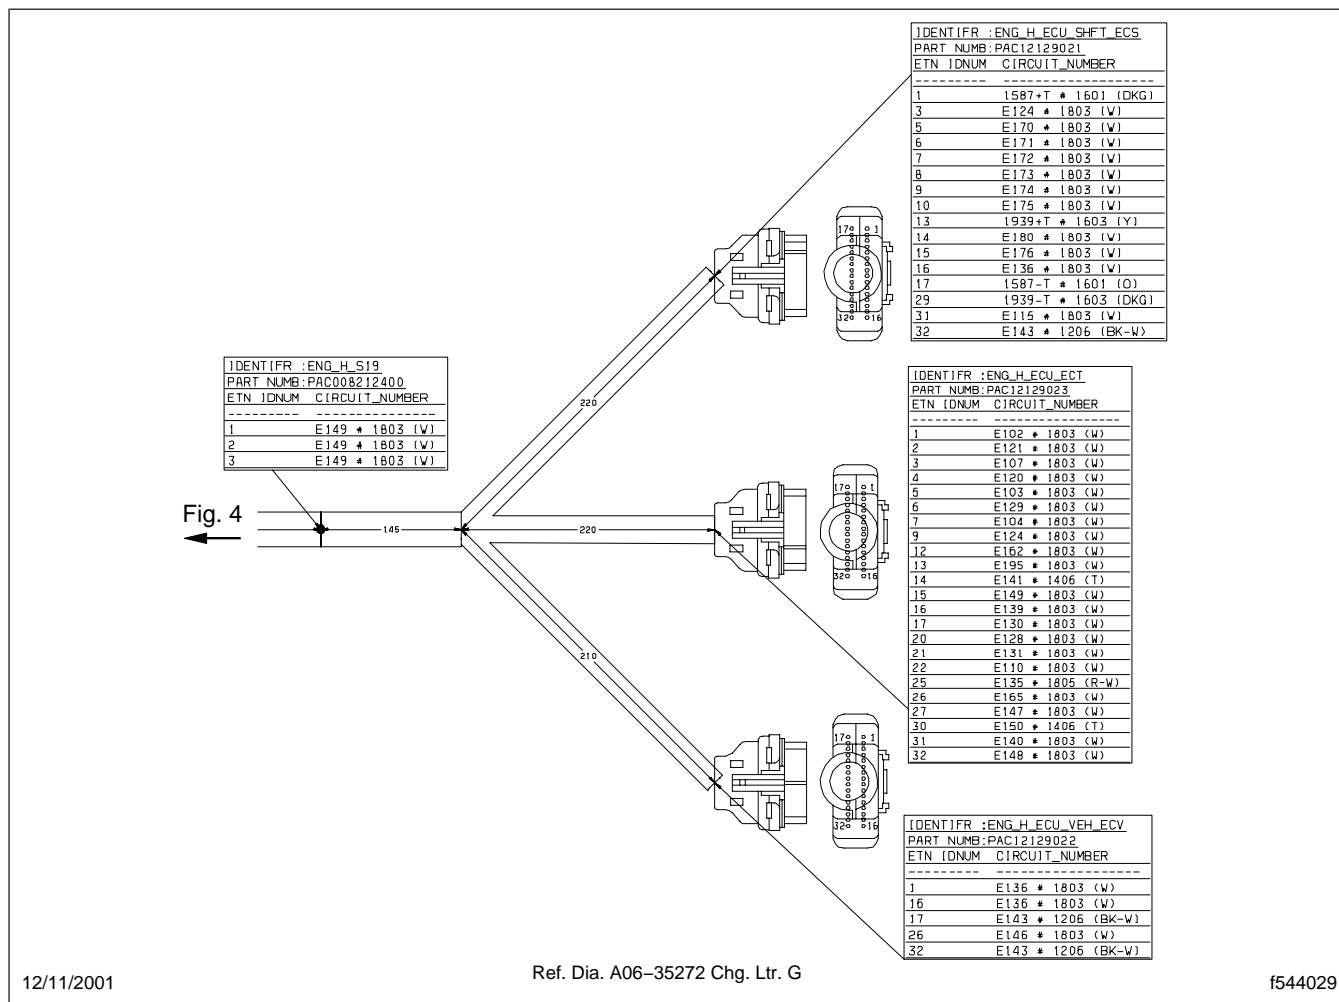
, MBE900 Engine Harness, Automatic Transmission (detailed view, engine connector end)
